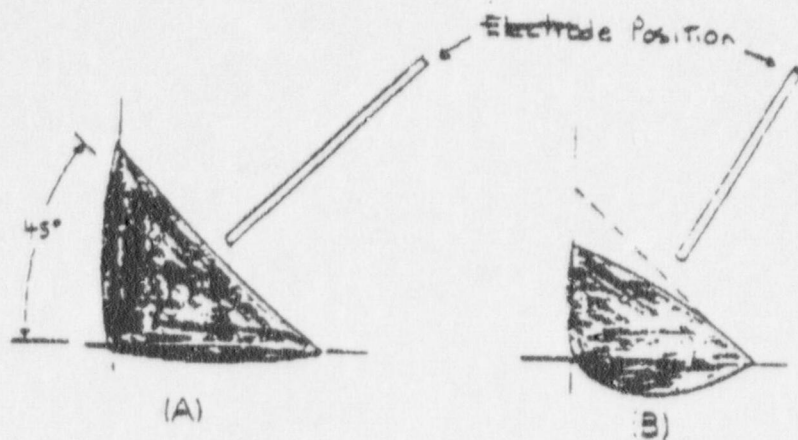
Fillet Weld Profiles Showing Acceptable (A) and Unacceptable (B) Profiles
